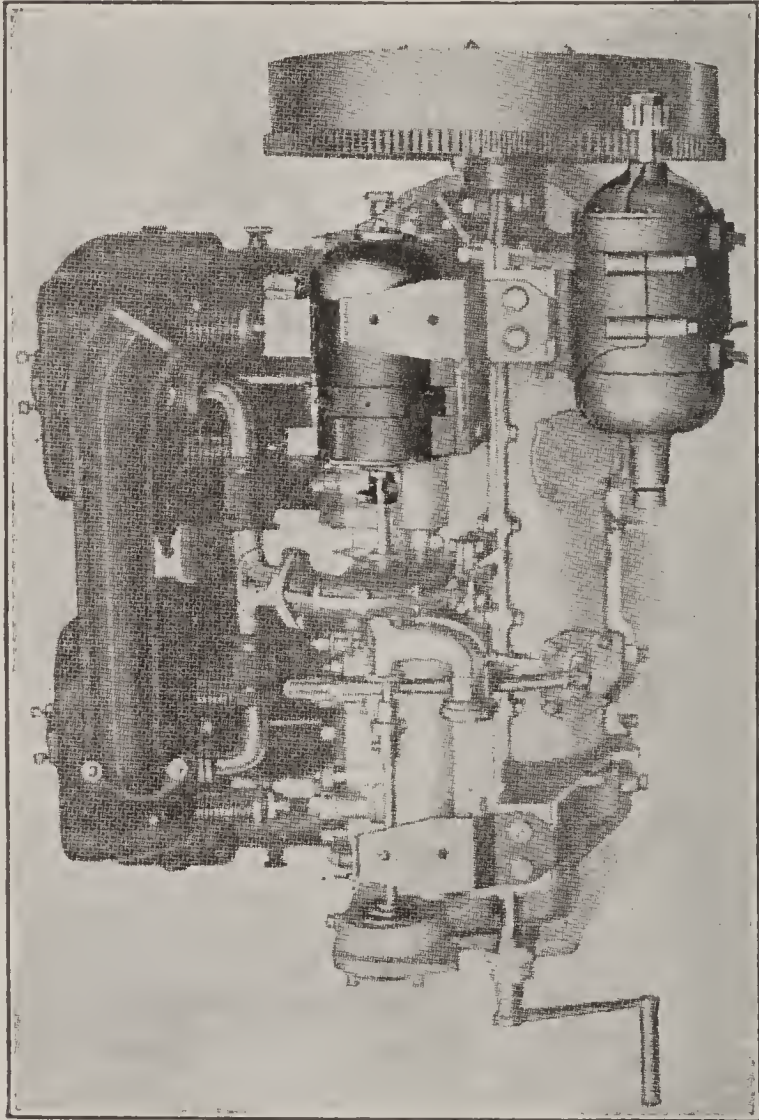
Rushmore Dynamo and Starter on Simplex Engine.
